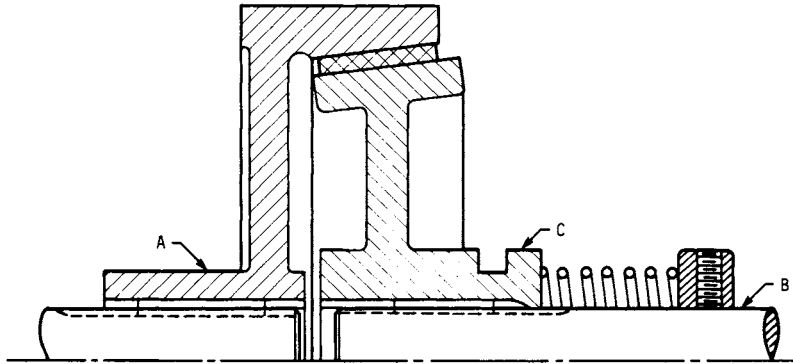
Schematic drawing of a cone clutch; A, driving member; B, driven shaft; C, movable sleeve.
